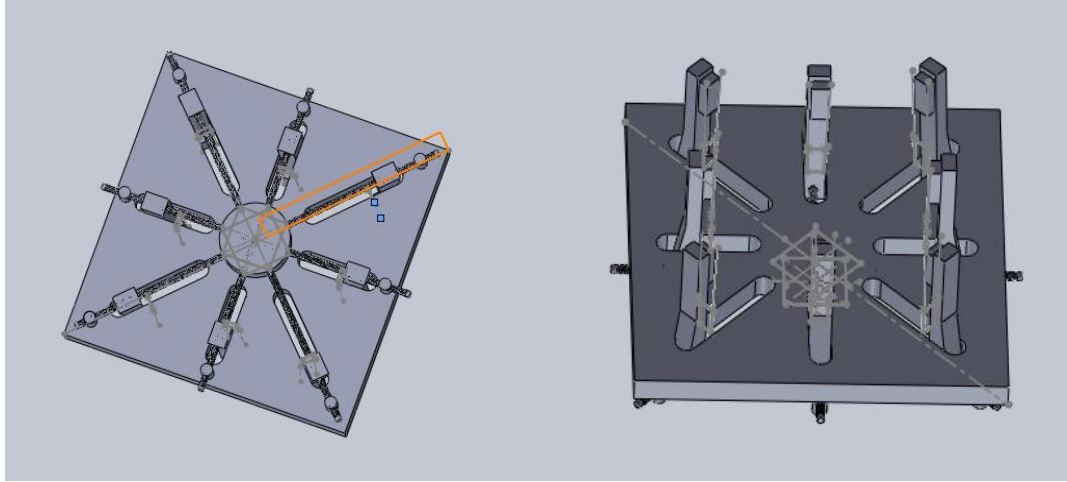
Plan view (left) and assembled view of Modular Fixture (Right)
